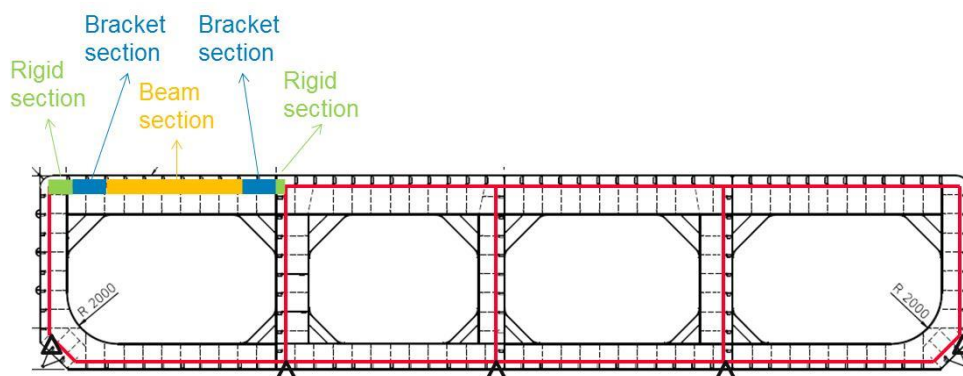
Beam sections of a web frame (not the H-541), divided in: rigid section, bracket section and beam section [22].
